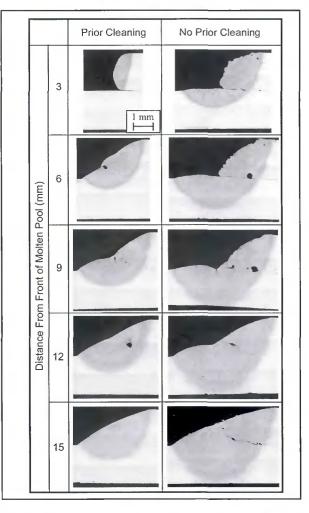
Cross sections through fillet weld in lap joint craters showing weld pool development, 1.5-mm-thick aluminum Alloy 5182 at 1 m/min.
